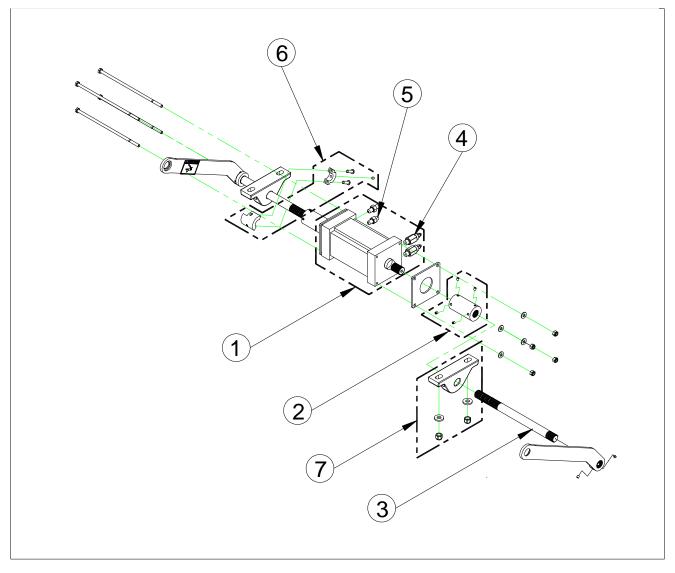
ROTARY ACTUATOR ASSEMBLY
